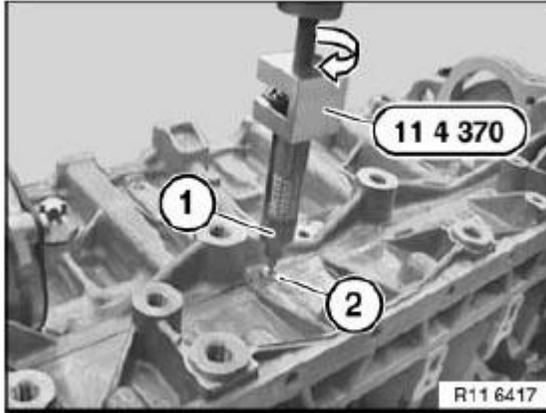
Inserting Liquid Gasket Using Special Tool (11 4 370)
